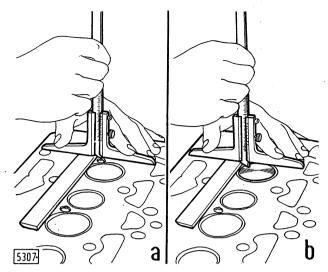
Mesauring nozzle projection above cylinder head plane (a) and valve recessing (b). (Nozzle projection: $2 \div 2.5 \text{ mm} = 0.08 \div 0.10 \text{ in.}$ Valve recessing: $0.7 \div 1.1 \text{ mm} = 0.03 \div 0.04 \text{ in}$).
